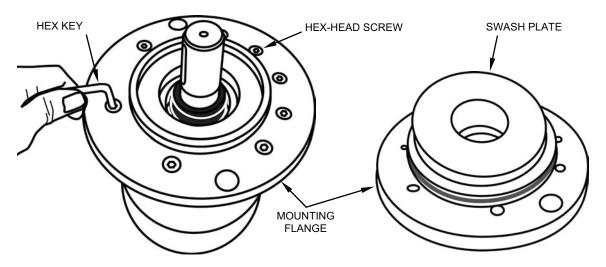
Removing Hex-Head Screws from Mounting Flange.
